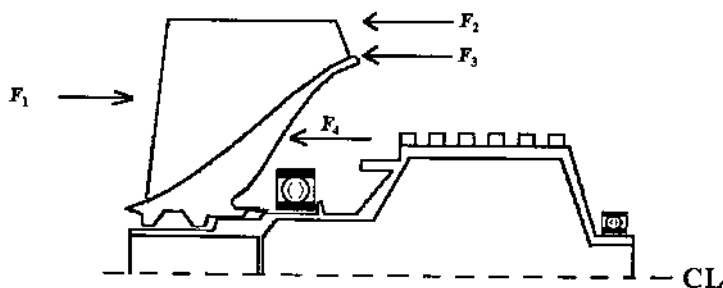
Inducer axial thrust components: F_1 , inducer inlet pressure force; F_2 , inducer outlet pressure force; F_3 , inducer momentum force; F_4 inducer hub cavity pressure force (nonconstant over cavity area).
